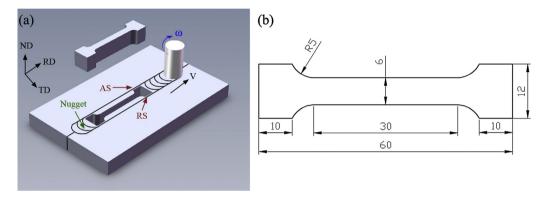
Schematic diagram of tensile specimens: (a) cut position; (b) detailed size.
